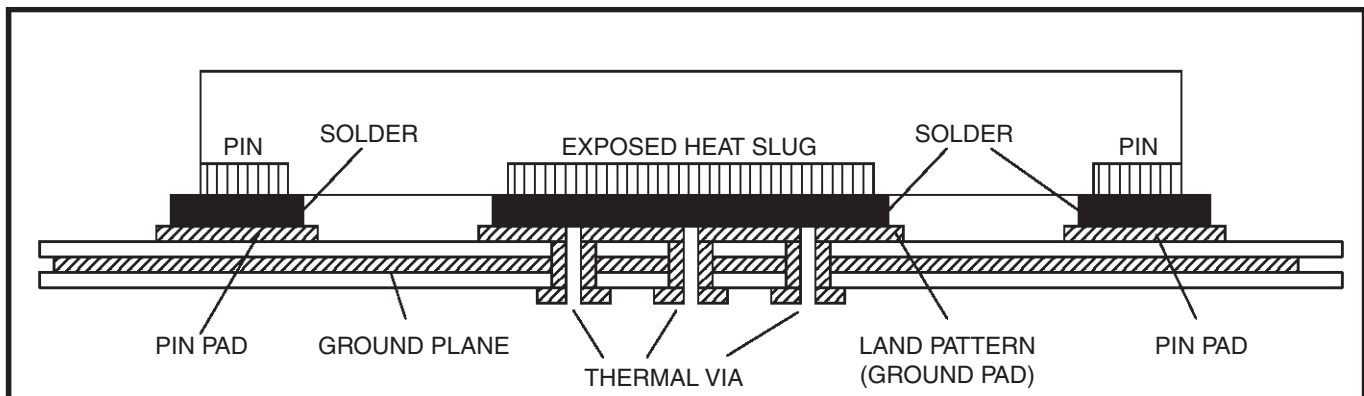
P.C. Assembly for Exposed Pad Thermal Release Path – Side View (drawing not to scale)
